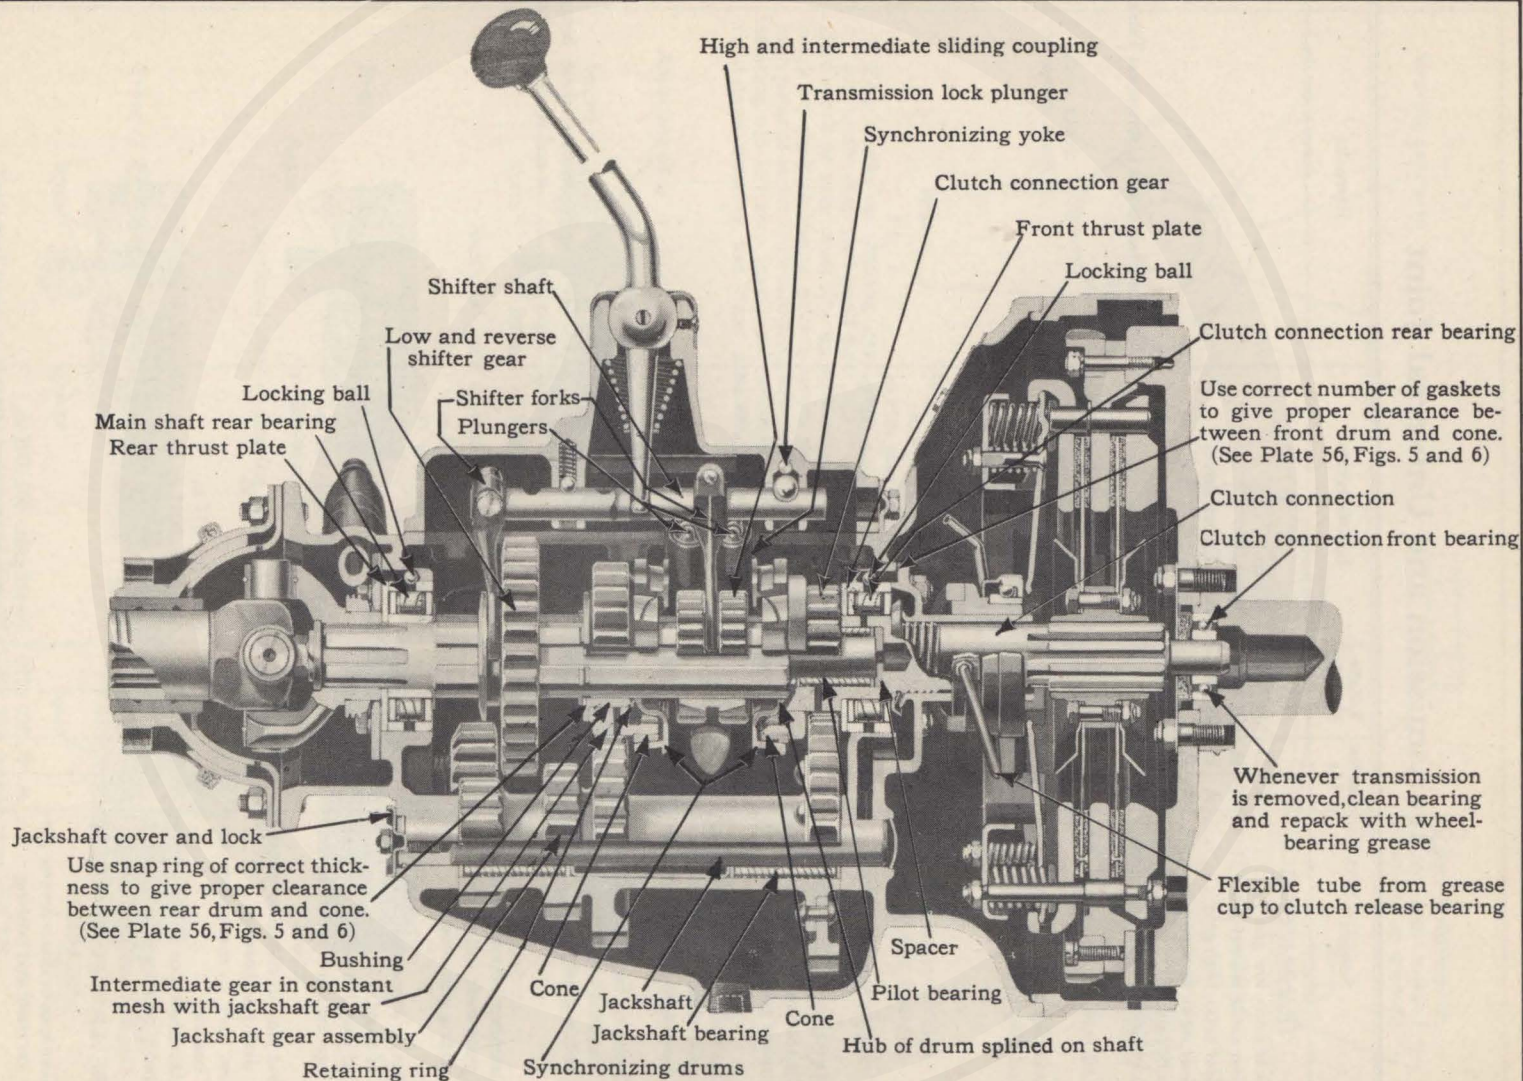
Sectional view of transmission, Cadillac 341-B and La Salle 328.
